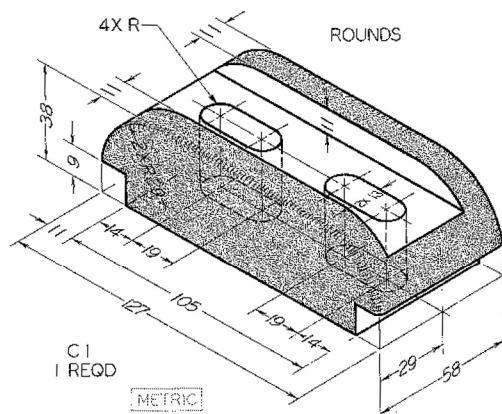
Tailstock Clamp (Layout A-3).
